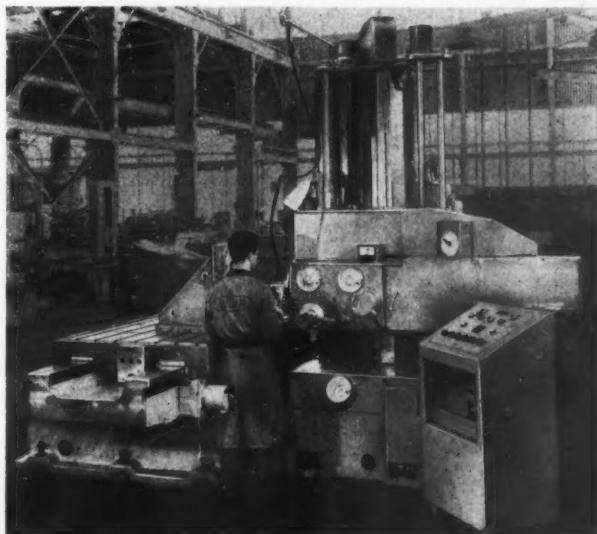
An example from the range of Bullard Dynamill horizontal boring machines
